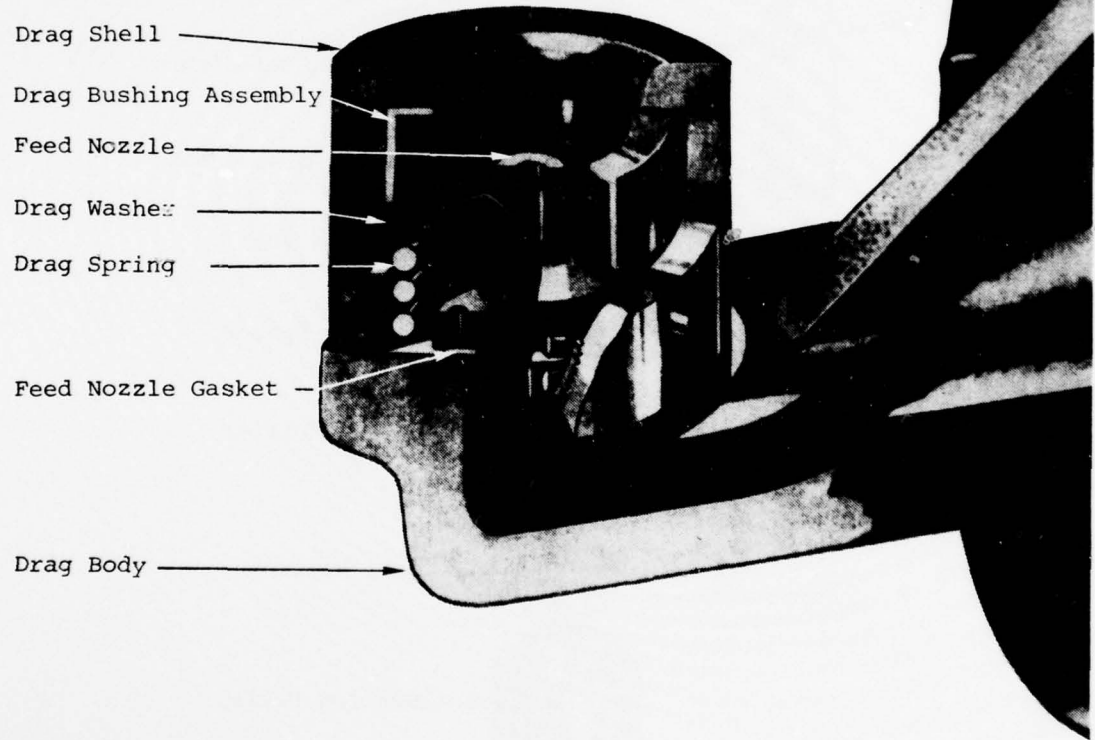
DRAG ASSEMBLY OF LUBE OIL PURIFIER (from NAVSHIPS Technical Manual 0945-003-6010, Figure 46, p. 4-14)
